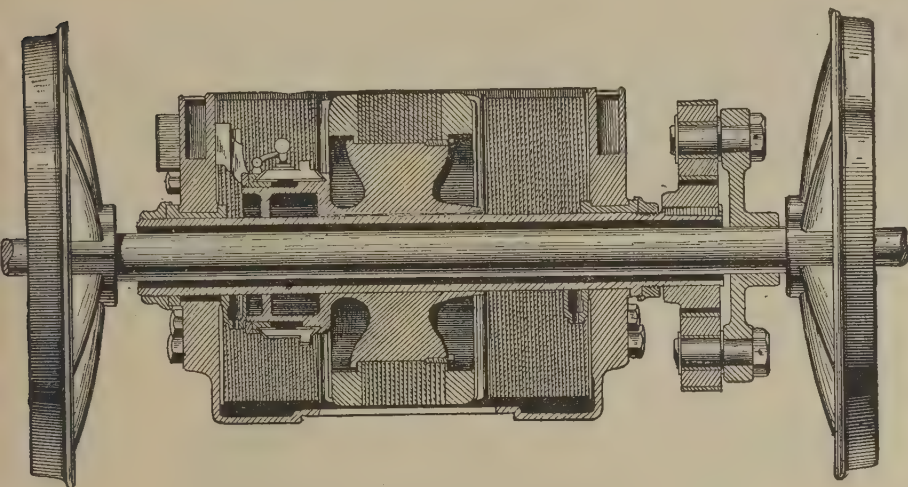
SECTION OF FOUR POLE (SHORT) GEARLESS MOTOR.
